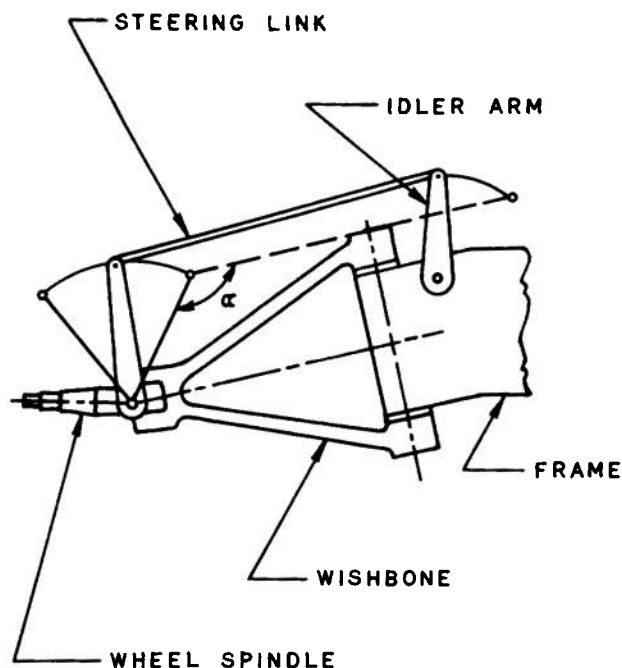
Plan View Showing Steering Arm Above Wheel Centers
